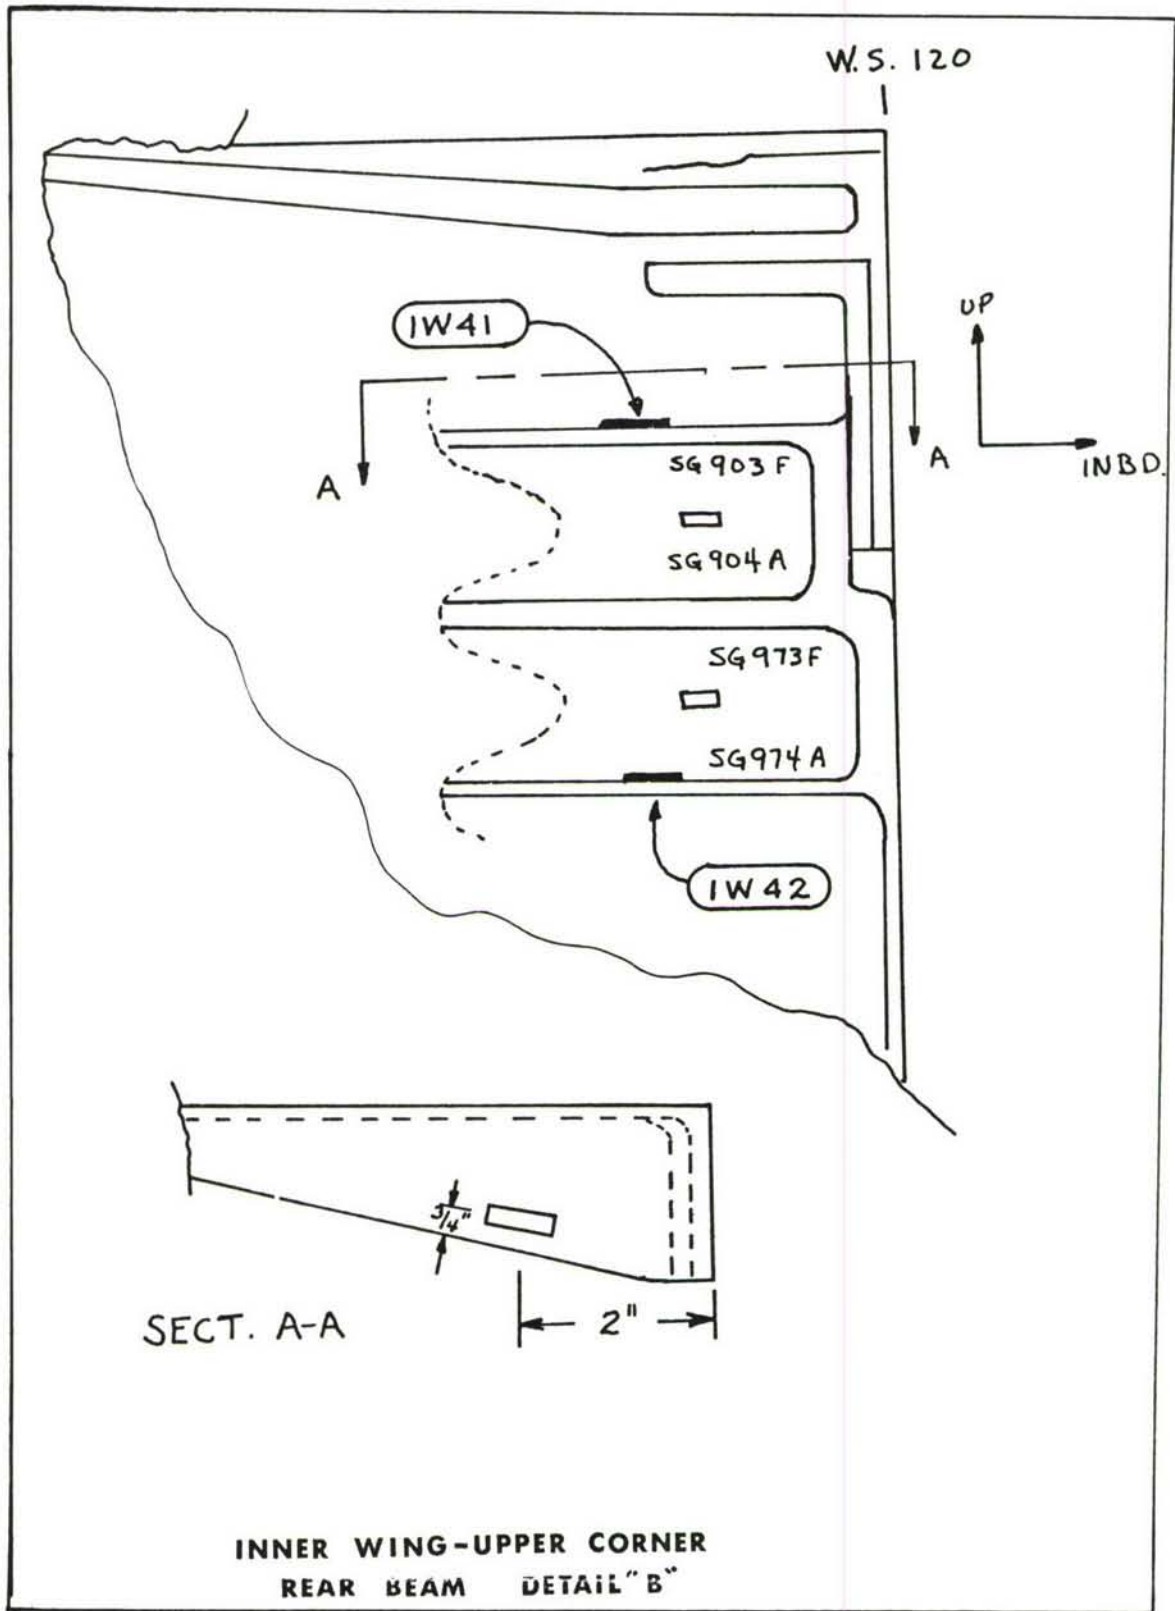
DETAIL OF STRAIN GAGE AND SENSOR LOCATIONS ON THE REAR BEAM ATTACHMENT FITTING
